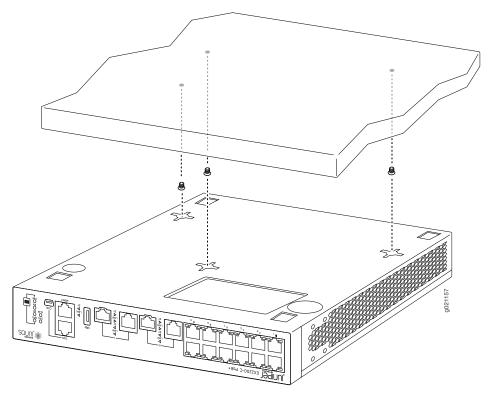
Measurements for Installing Mounting Screws for EX2200-C Switch
